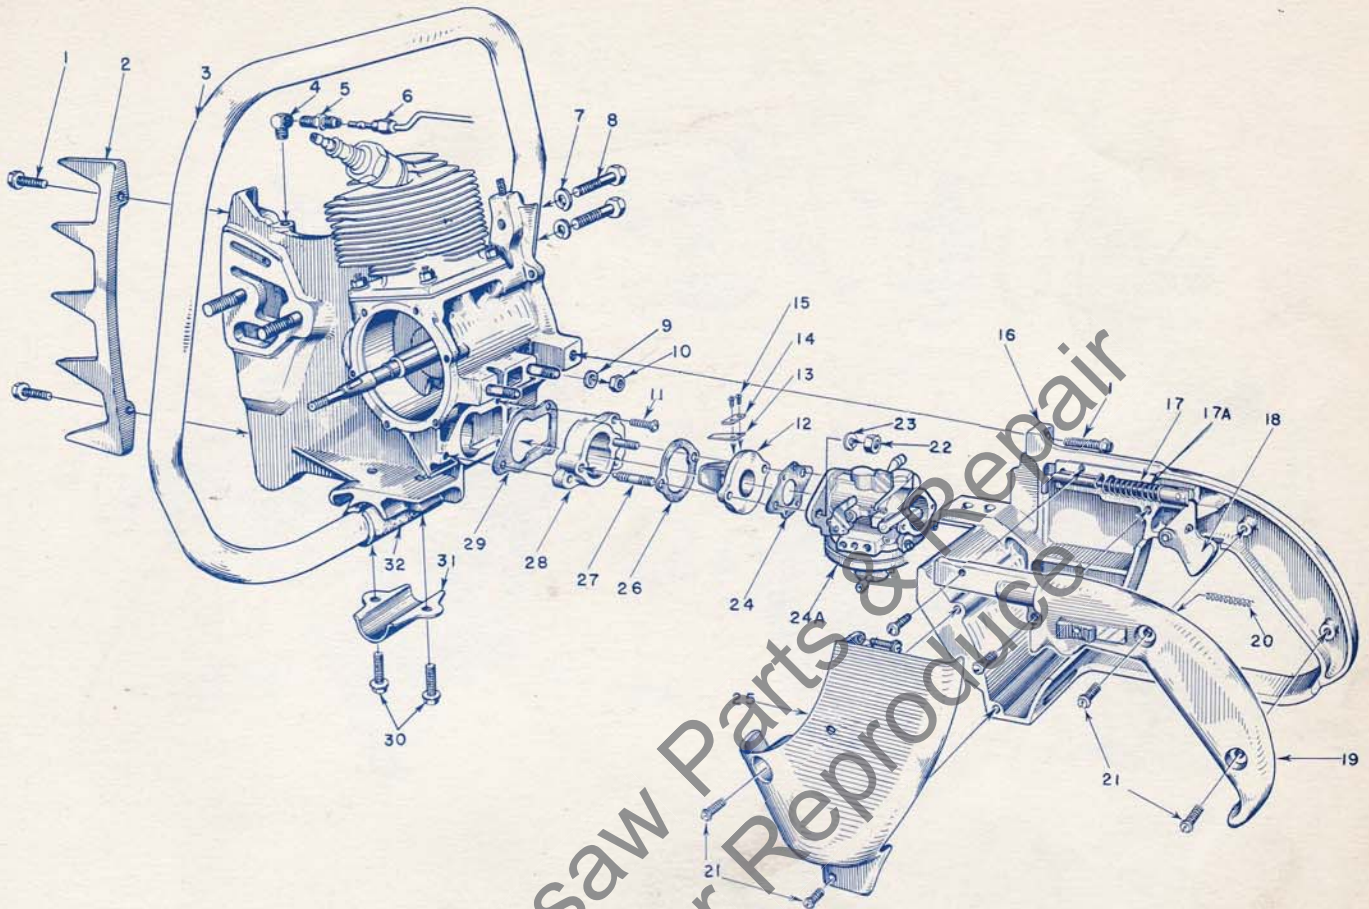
HANDLE, GRIP AND REED VALVE PARTS
